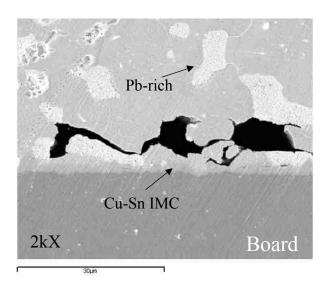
A closer view (at higher magnification) of the Solder Joint Crack in Figure 15.
